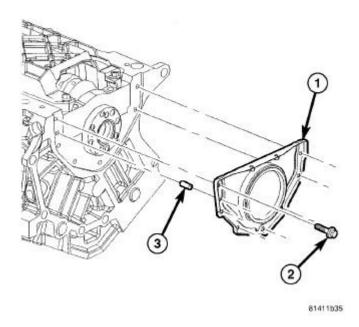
REAR CRANKSHAFT OIL SEAL AND RETAINER Courtesy of CHRYSLER LLC
